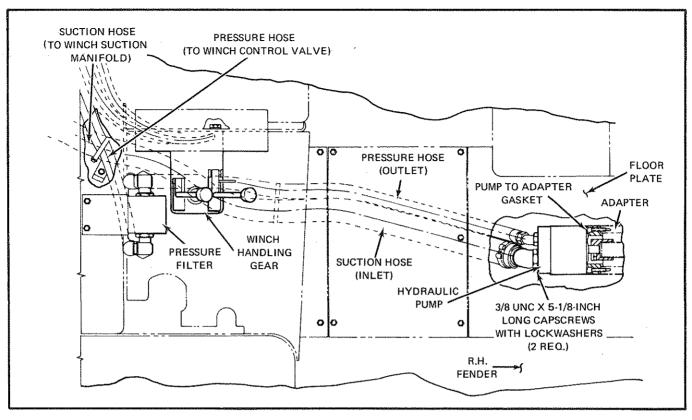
Removal of Hydraulic Pump Assembly (D9 Tractors).
